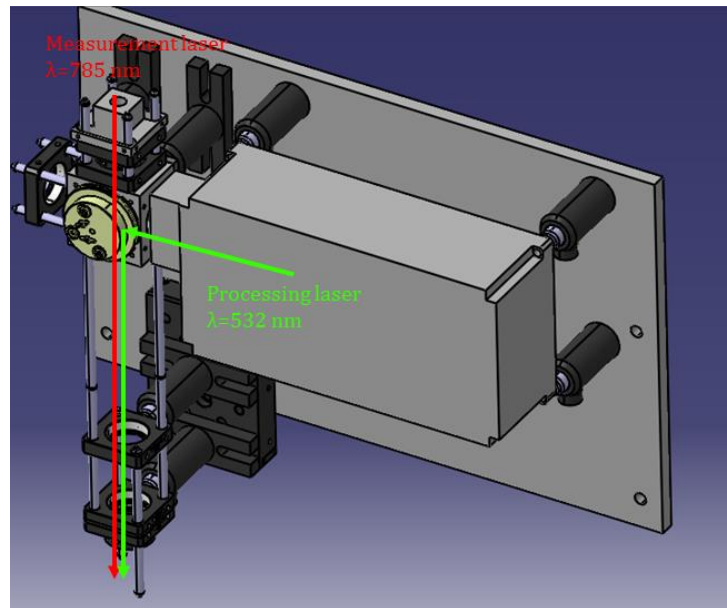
Three dimensional CAD model of the opto-mechanical system for the laser self-mixing interferometry study.
